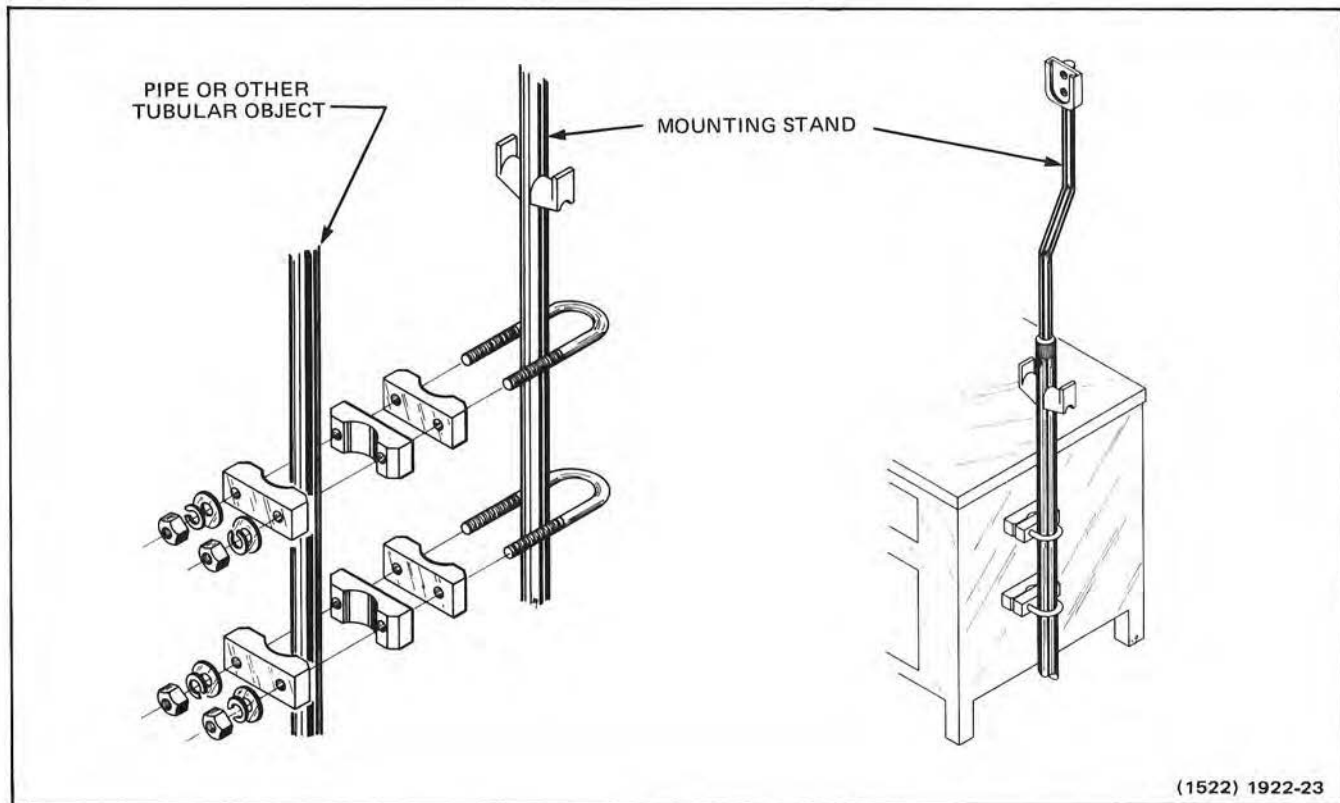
Method of mounting to tubular object (pipe) or cabinet side.
